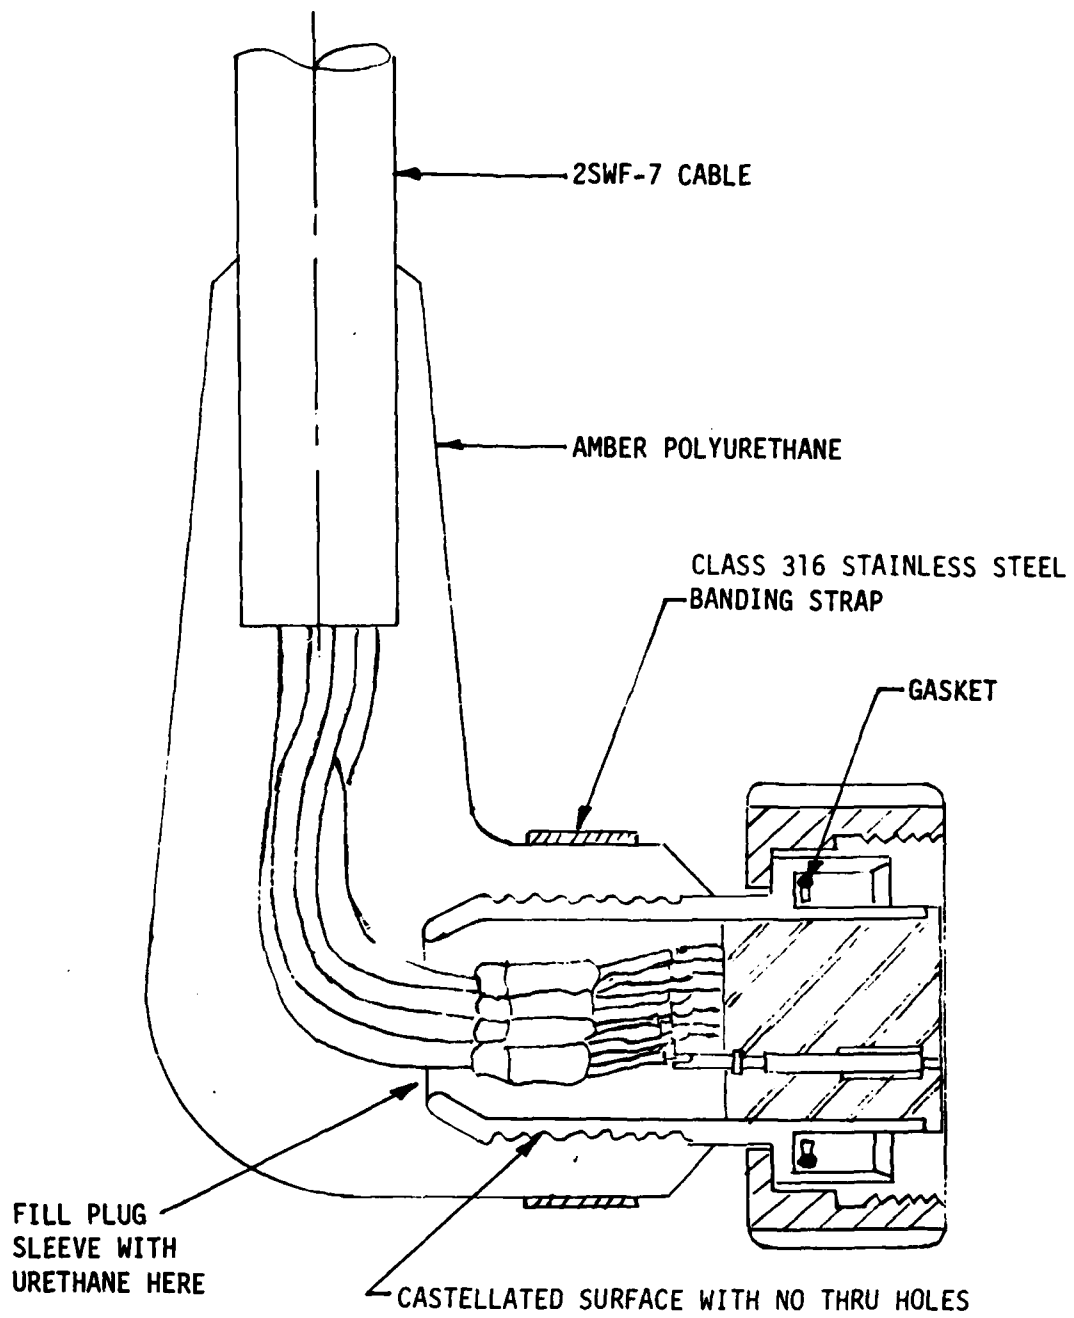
RAPLOC MIL-C-24231 MODIFIED PLUG ASSEMBLY
